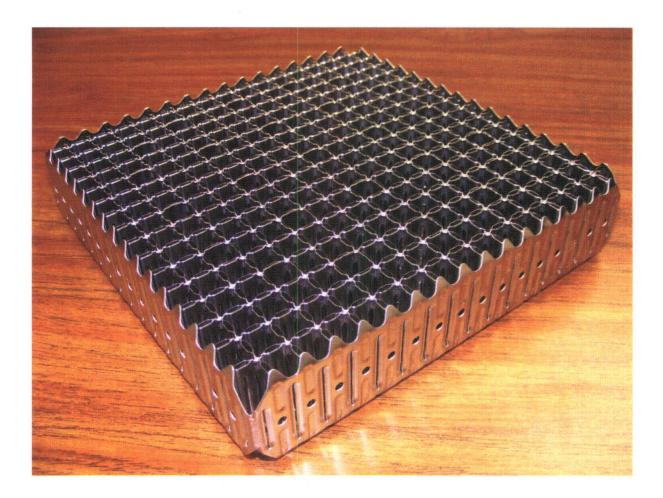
Adv. W17 HTP Fuel Rod Assembly
